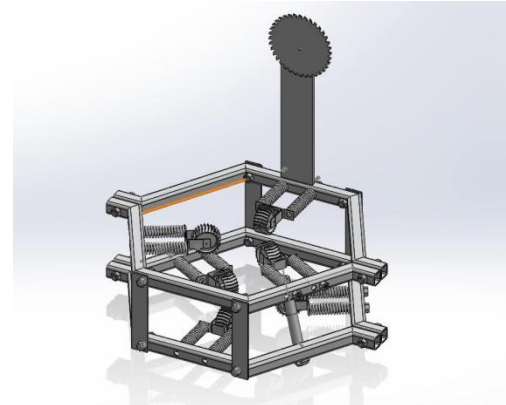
(B) 3D MODEL OF COCONUT HARVESTING MACHINE
